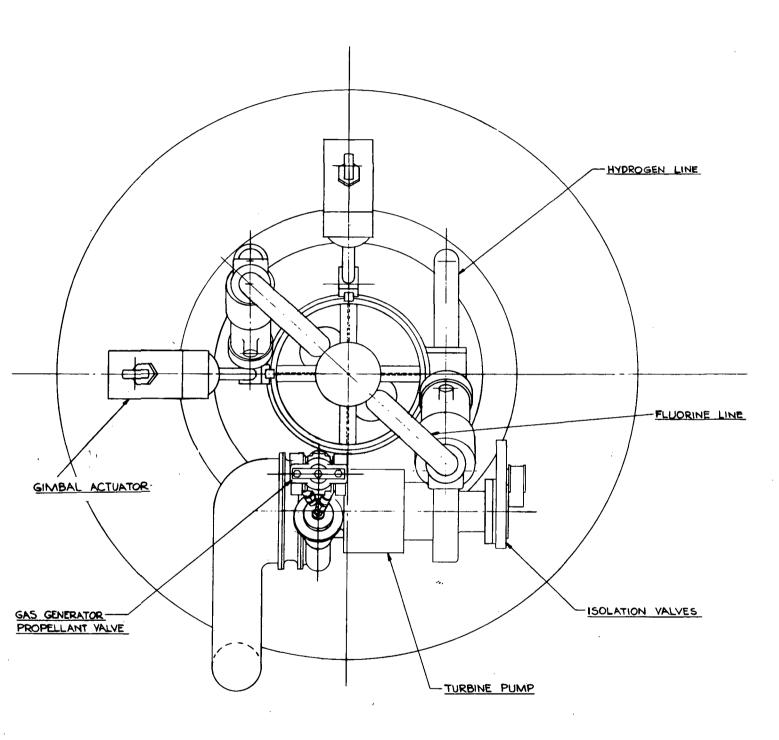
Major Components Installation – Rocket Engine Assembly (Sheet 2 of 2)
